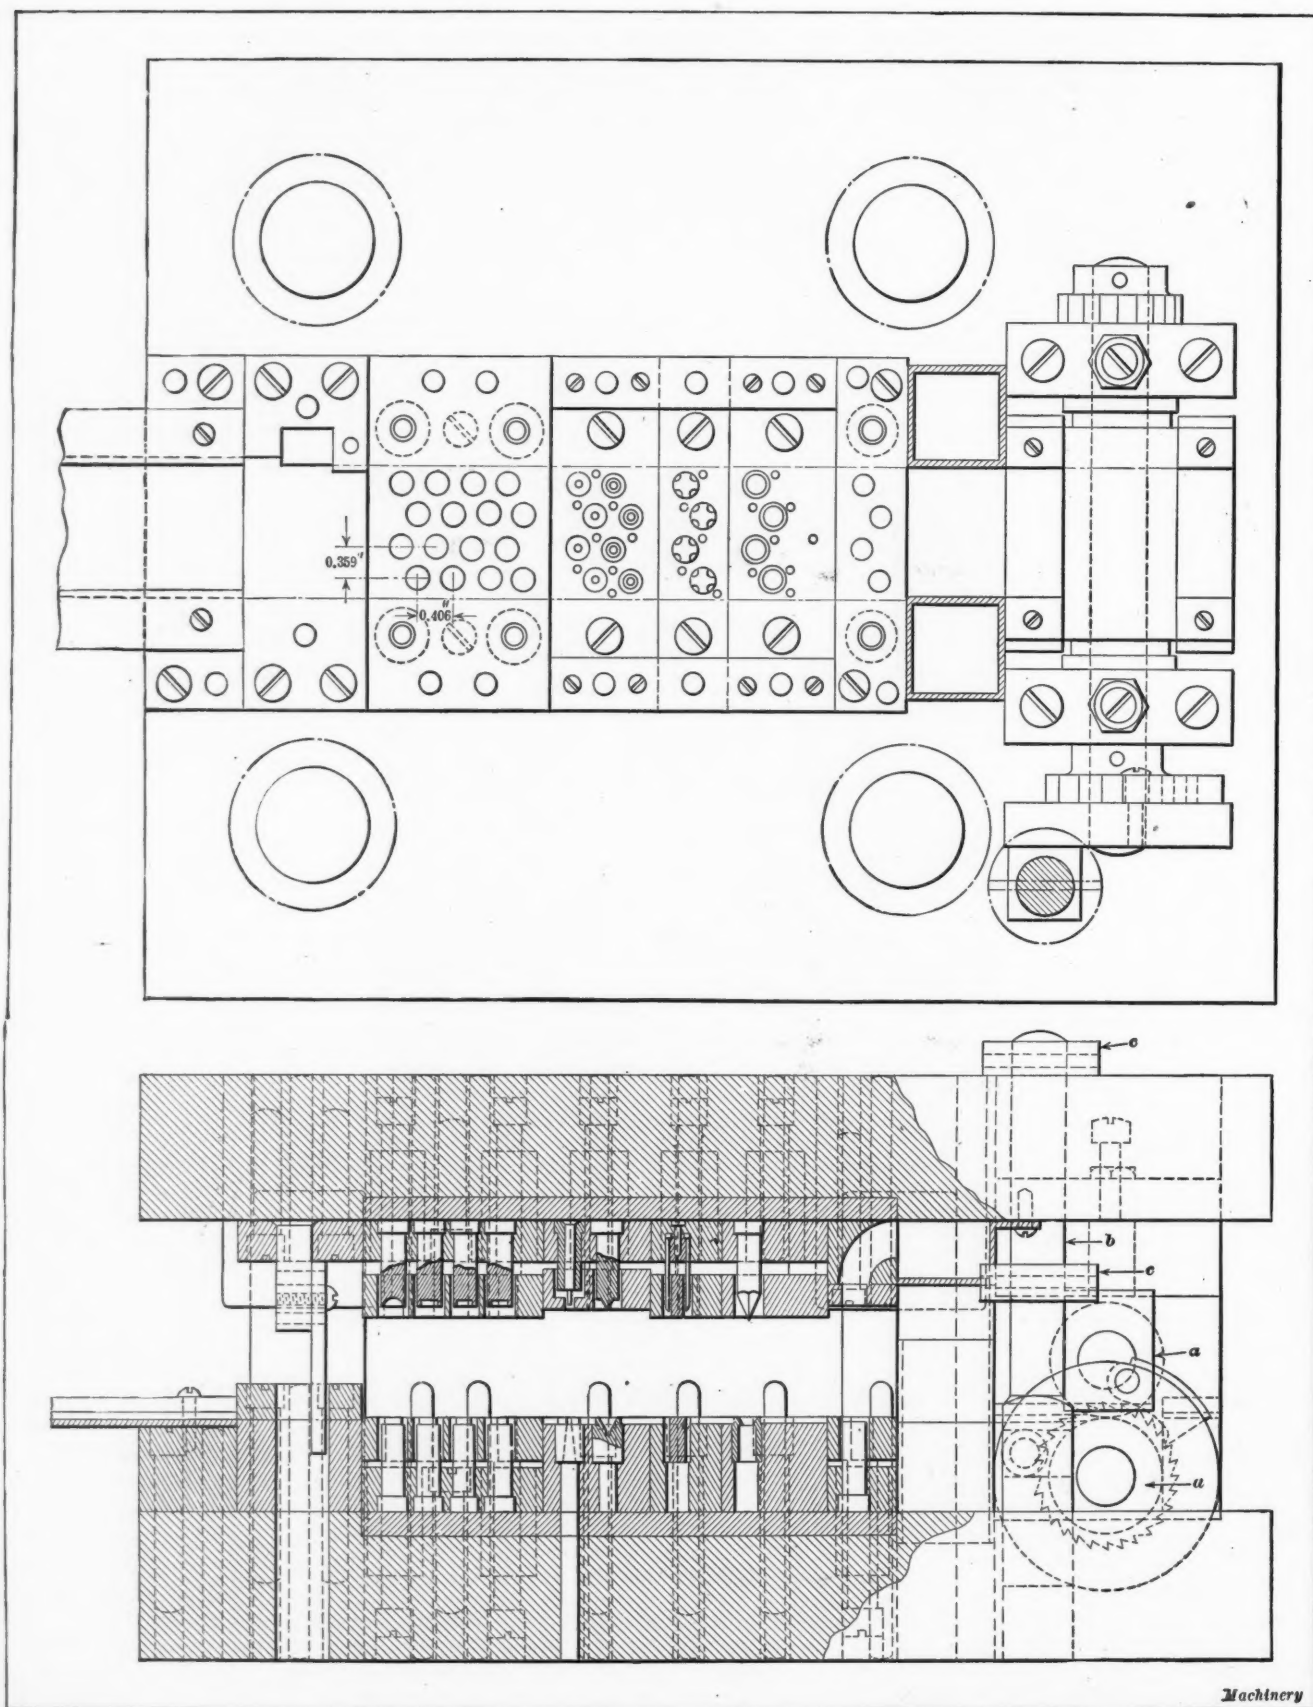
Cross-sectional View of Punch and Die for Socket, and Plan View of Lower Member
